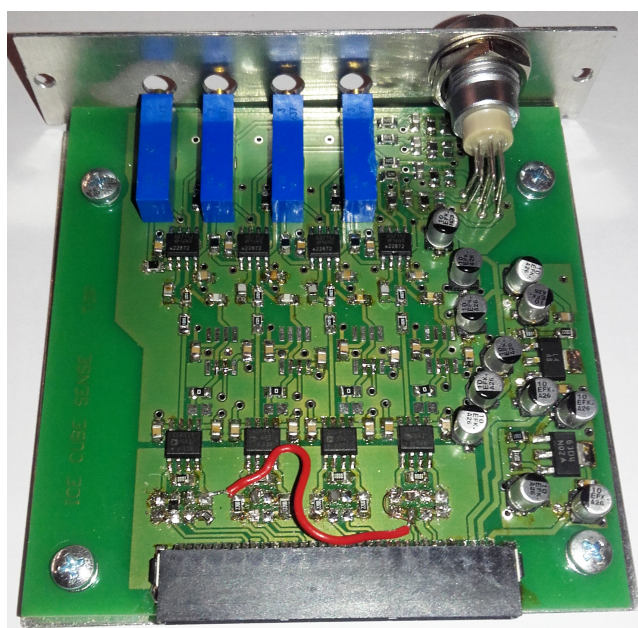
Circuit board layout of the sense IceCube insert
